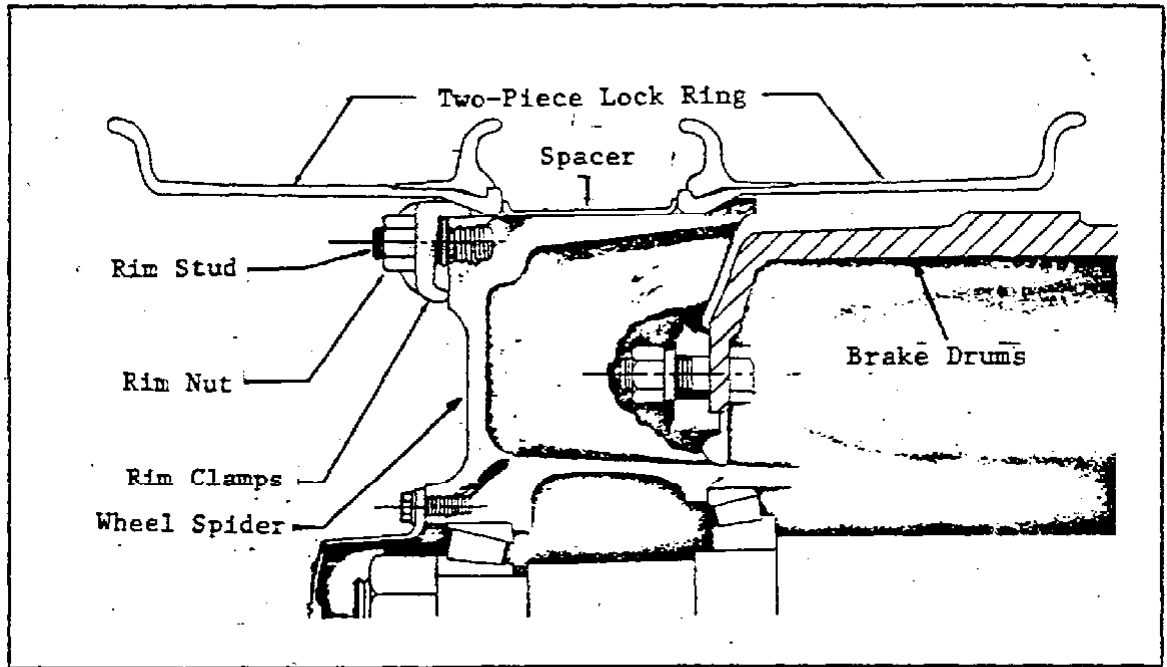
Two-Piece Lock Rim and Securement to Cast Spoke Wheel
